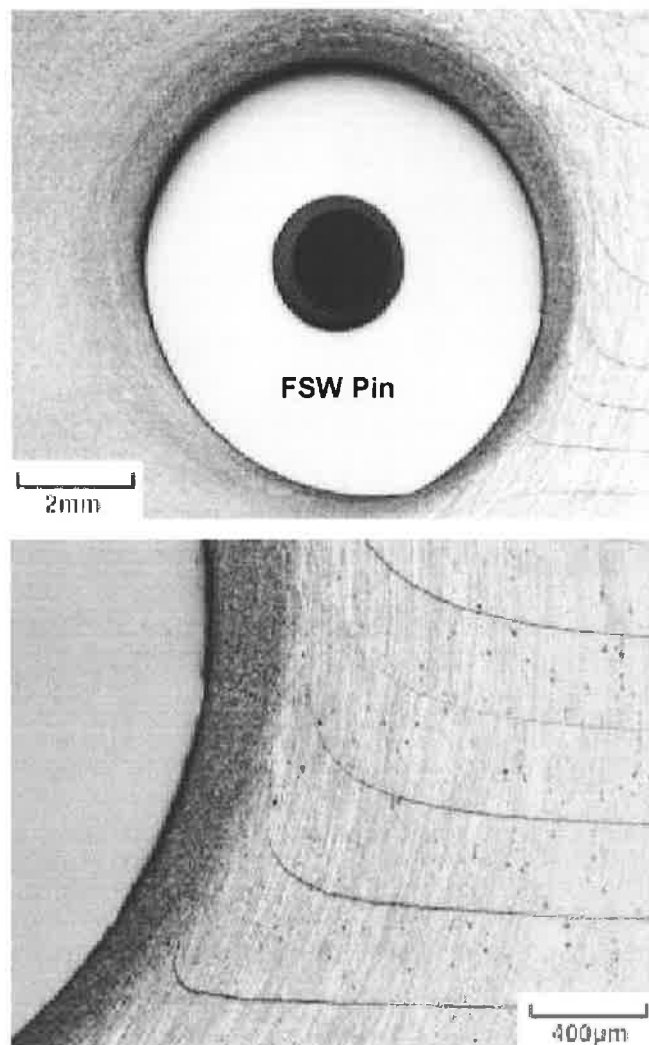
Bending of the markers in the direction of tool rotation ahead of the tool pin [59]
